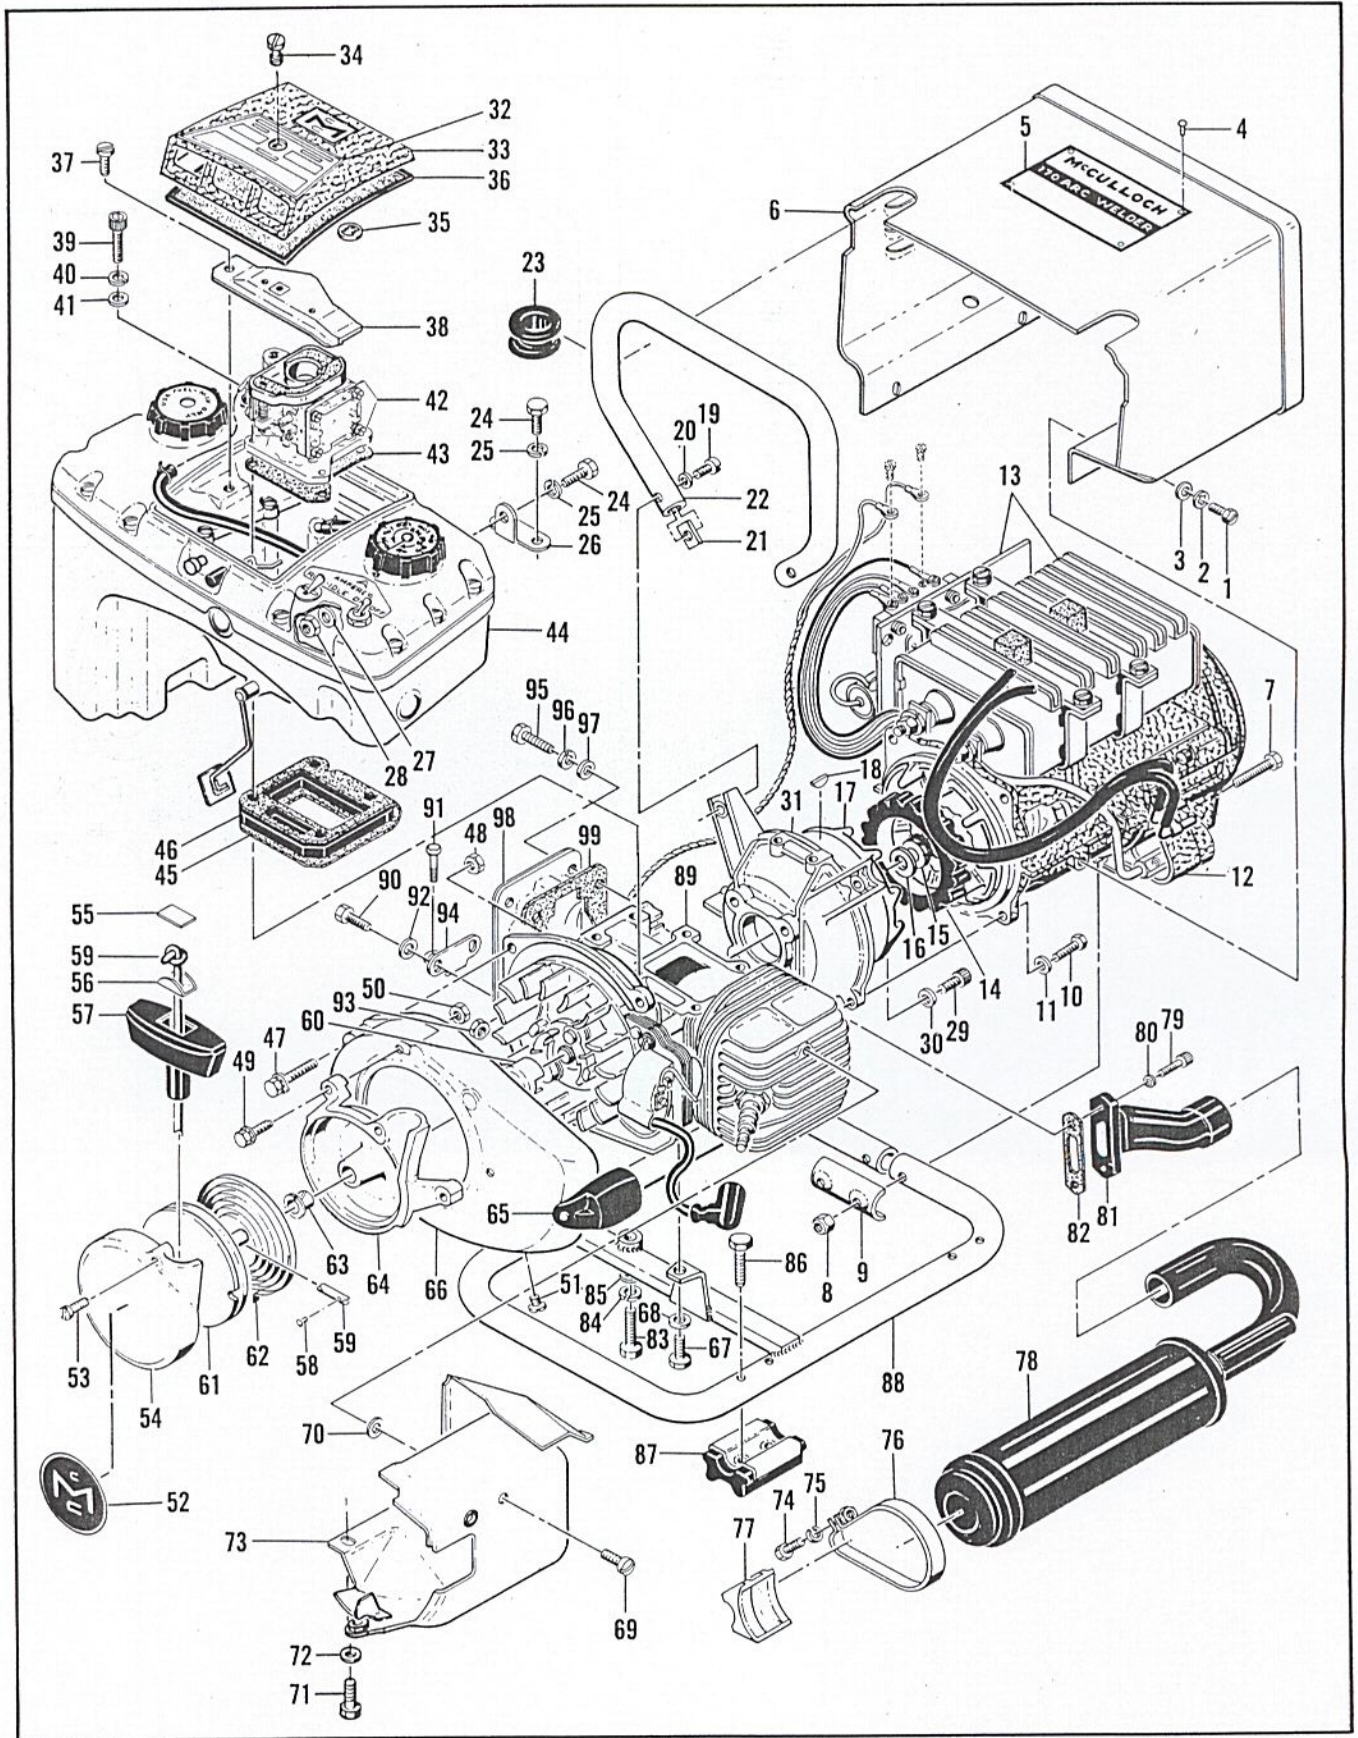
McCulloch 170 Arc Welder - Exploded View
